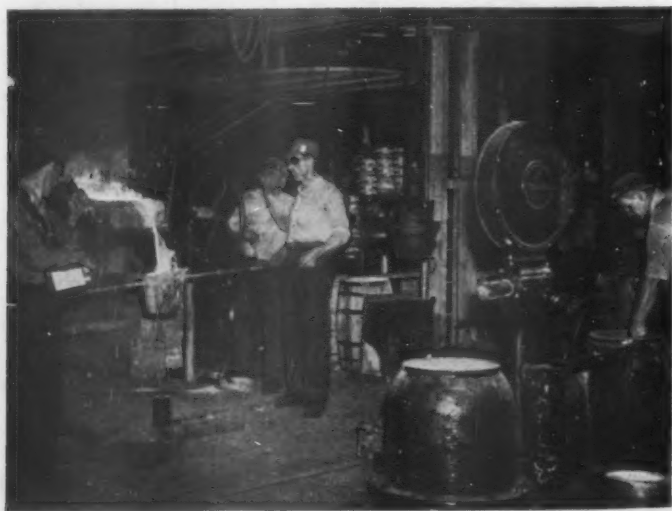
GENERAL VIEW OF THE LAYOUT FOR CENTRIFUGAL CASTING OF THE CYLINDER BARREL.
